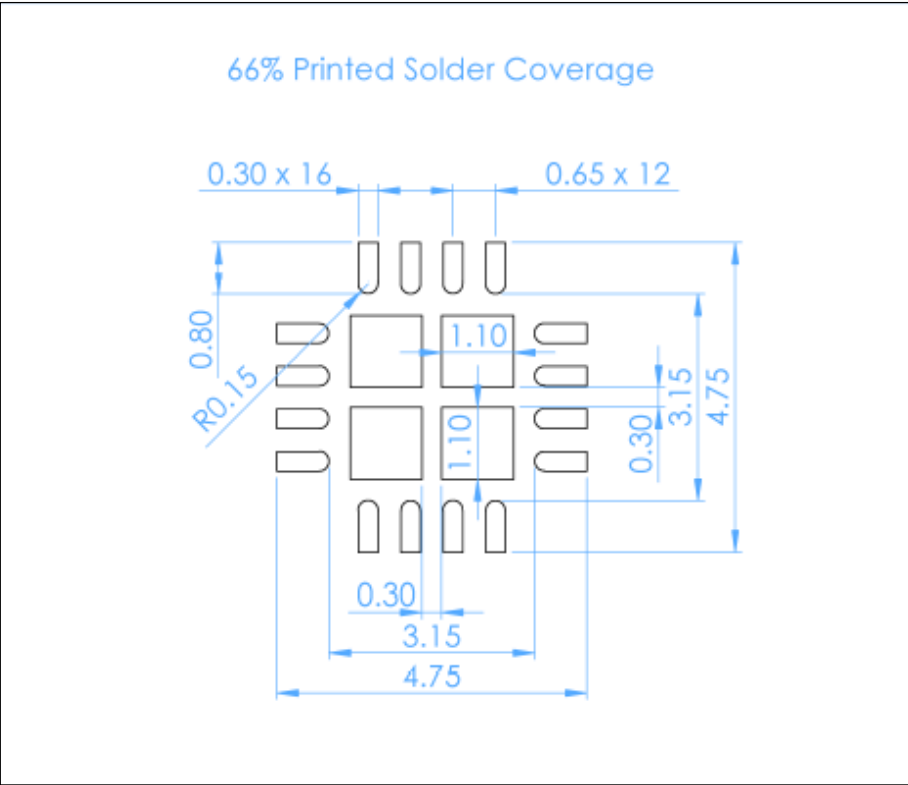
Suggested solder paste stencil. All noted dimensions in mm. Not to scale.
